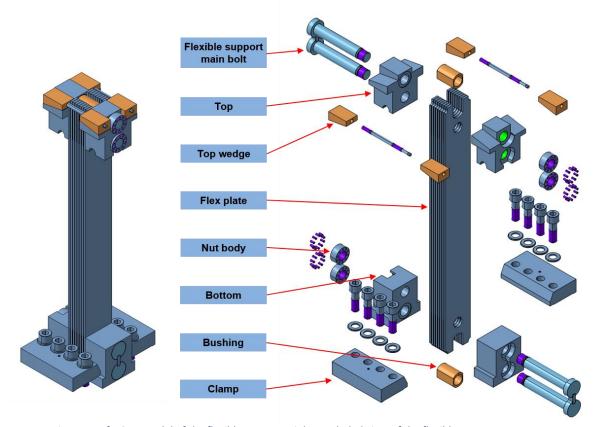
Left: CAD model of the flexible support. Right: exploded view of the flexible support components.
